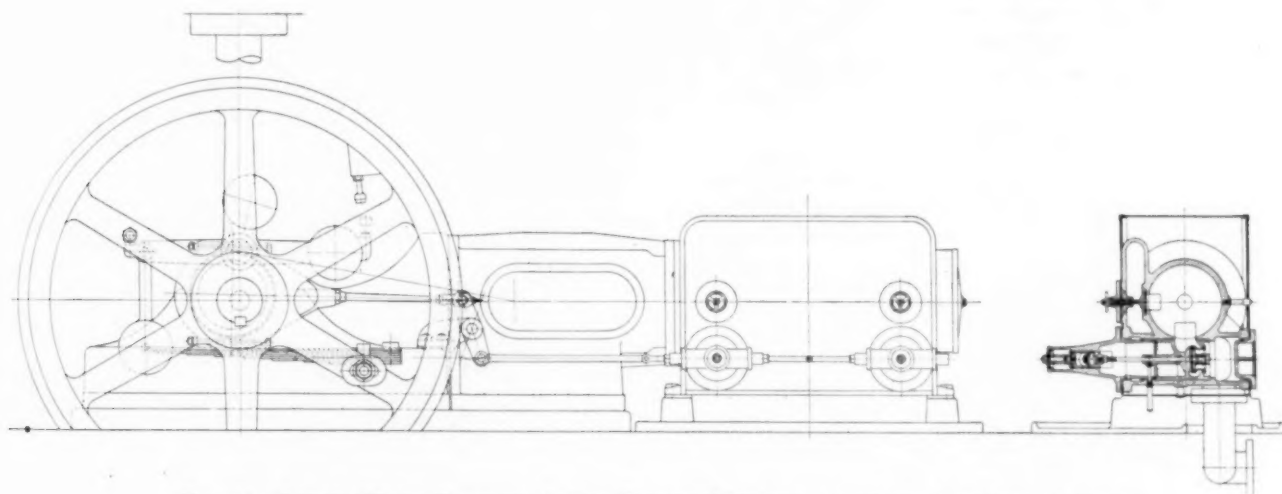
POPPET-VALVE UNIFLOW STEAM ENGINE WITHOUT AUXILIARY EXHAUST VALVES
